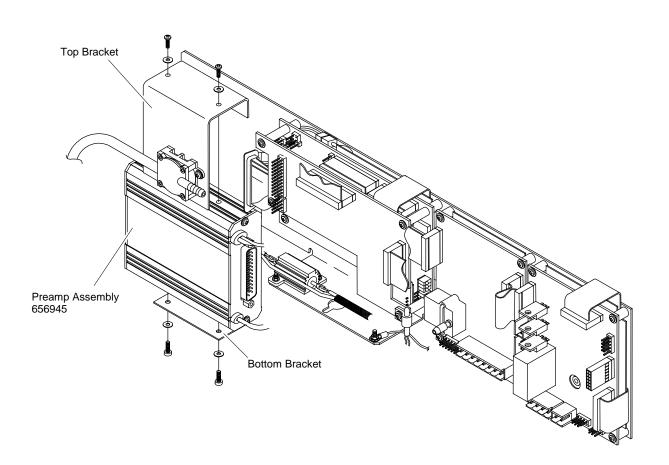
PREAMP ASSEMBLY INSTALLATION
